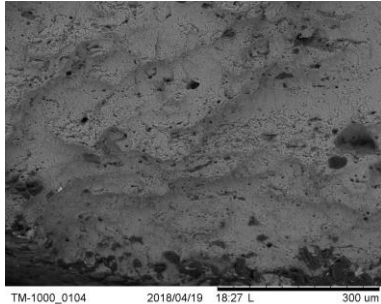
Fracture Surface on the Edge of a Specimen Containing a 1 000 μm Pore
